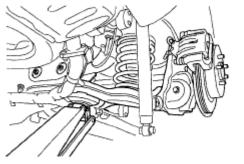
Supporting Rear Lower Arm Inner Side Courtesy of MAZDA MOTORS CORP.
